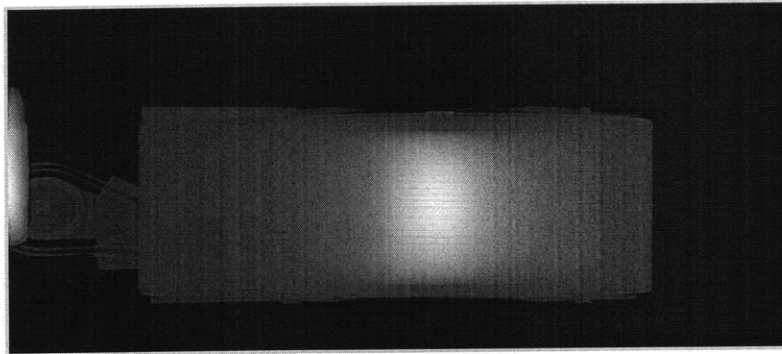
Front-view of the compression coil of the MAGNEFORM machine at MIT.
